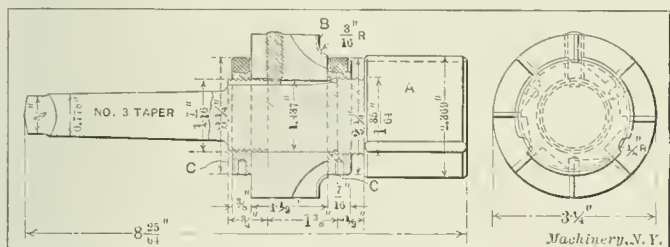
Tool used in Seventh and Final Operation for Facing Ends of Bearing and Giving Radius to Edges
